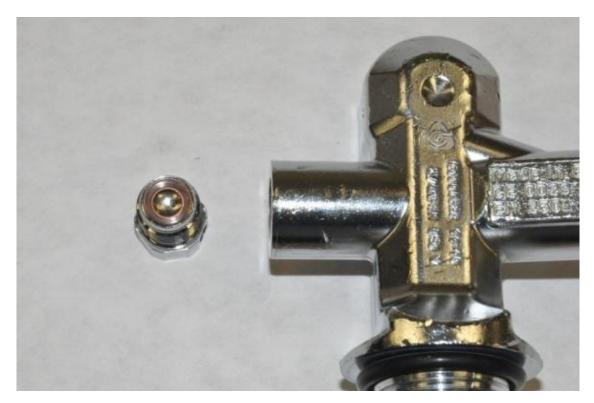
View of the exemplar pressure burst disk assembly showing the burst disk and retaining ring.
